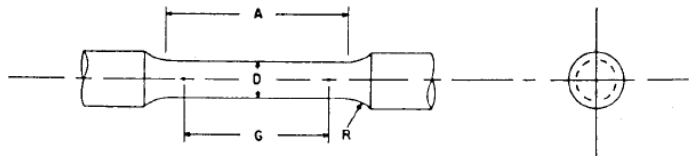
Sketch of the tensile specimens drawing specifications, adapted from Ref.[27].
